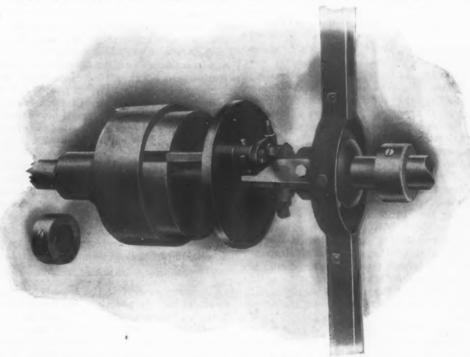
The Clutch with the Outer Shell Slipped Back to Expose the Internal Parts.
